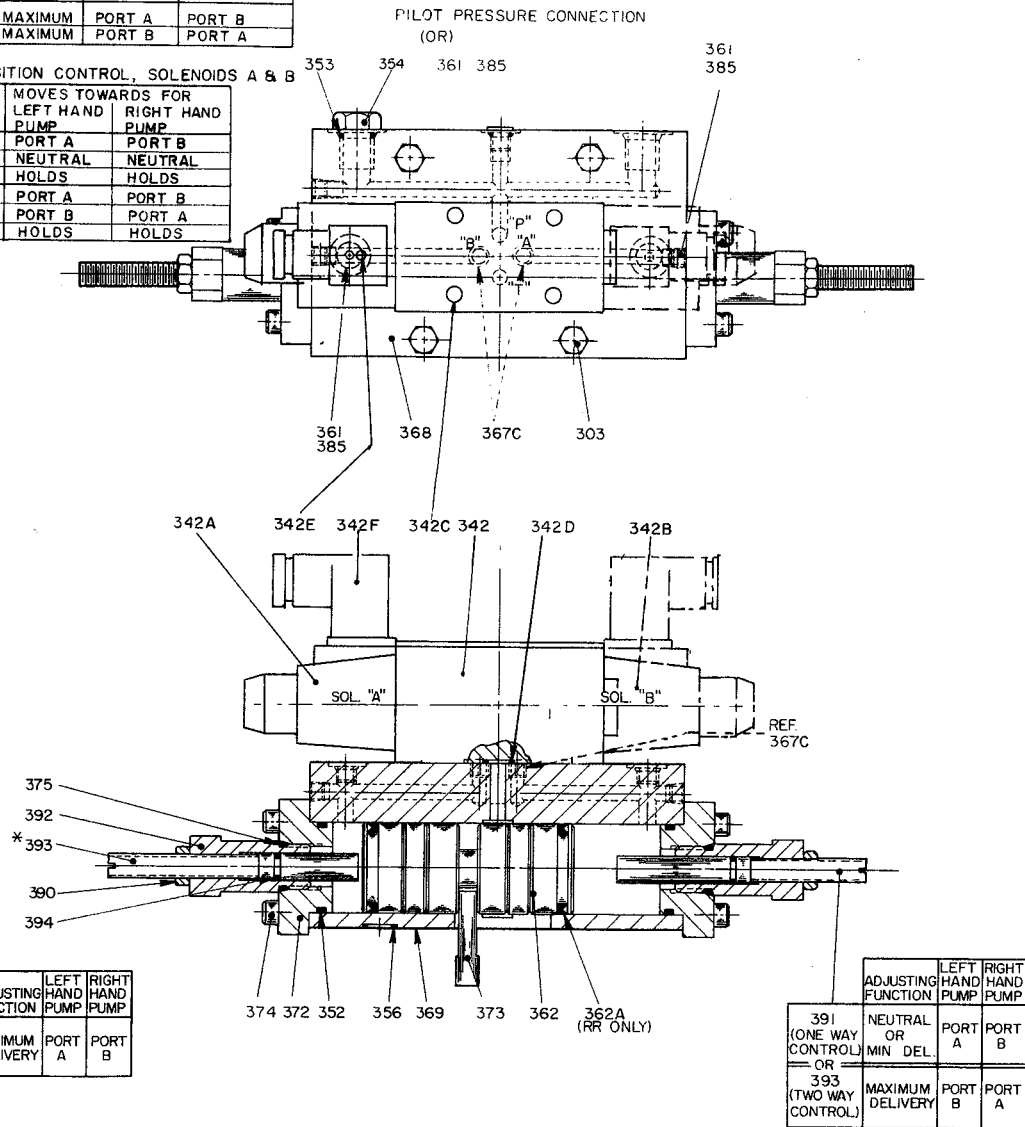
Parts Drawing, Oilgear Type "RU" and "RR" Controls. (510334)
